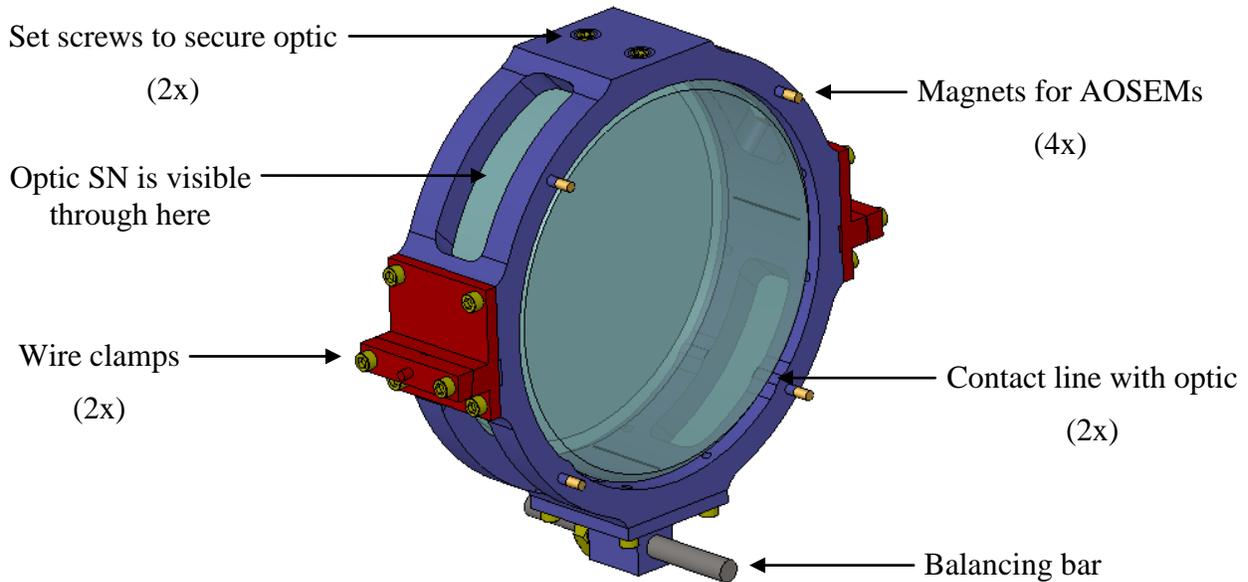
The aluminum barrel that holds the optic and hosts all the mounting fixtures. Some of them are indicated in the picture.
